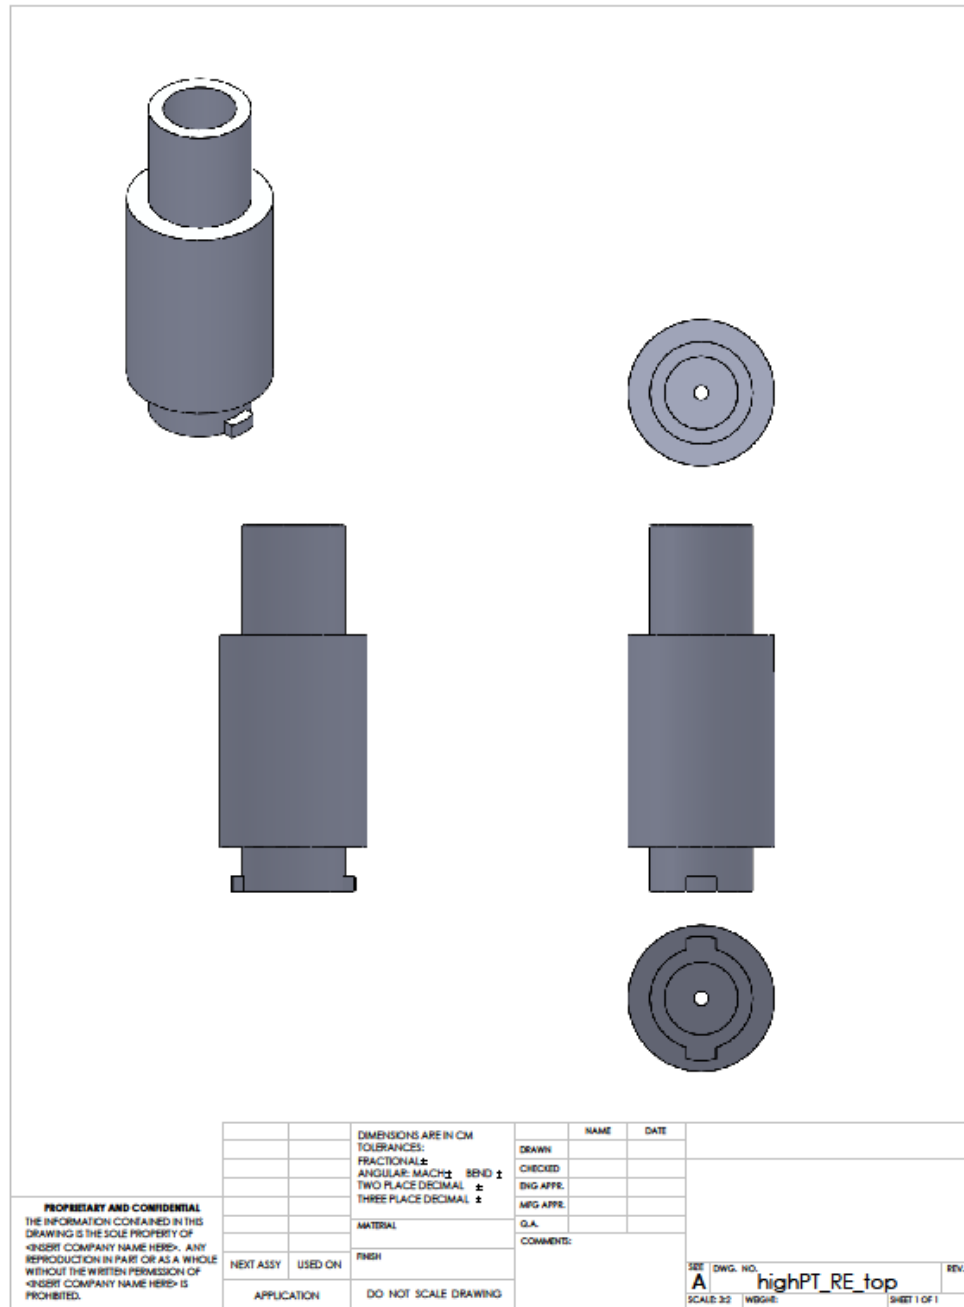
Front, top, bottom and isometric view of the main top component of the order-500-Re point source. Dimensions for the notches used to attach the main bottom component, shown in figure C-5, were omitted because the method used to connect the main top and main bottom component was not essential to the nozzle's functionality.
